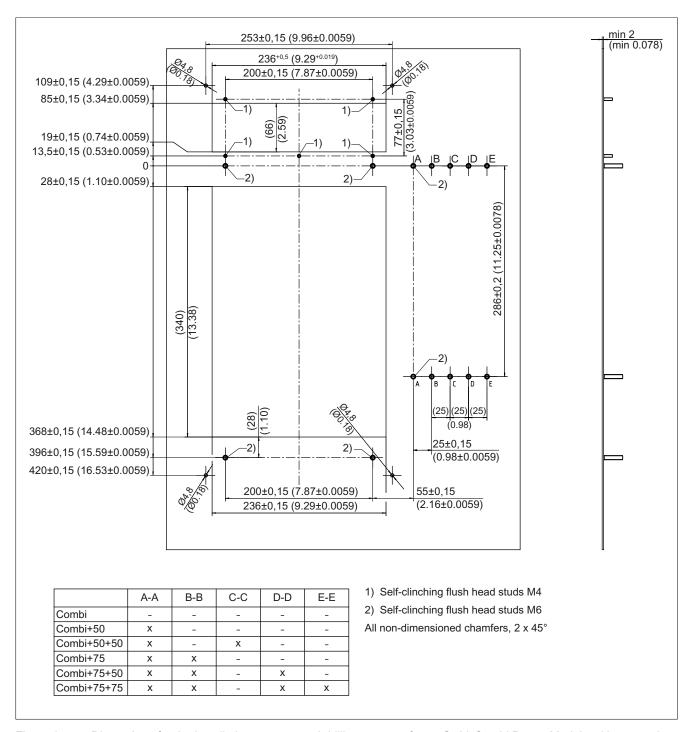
Dimensions for the installation cut-outs and drilling patterns for an S120 Combi Power Module with external fan unit, reinforcement plates and expansion axes, all dimensions in mm and (inches)
